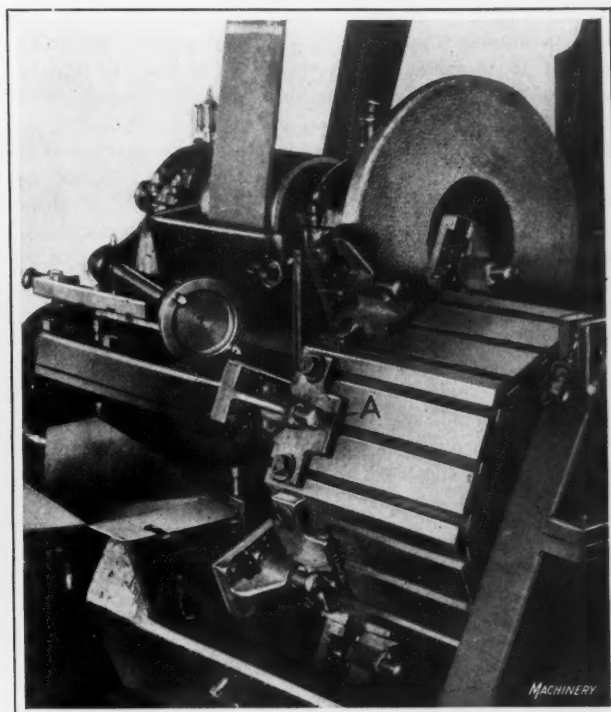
Fixture-holding Drum of Machine shown in Fig. 6
